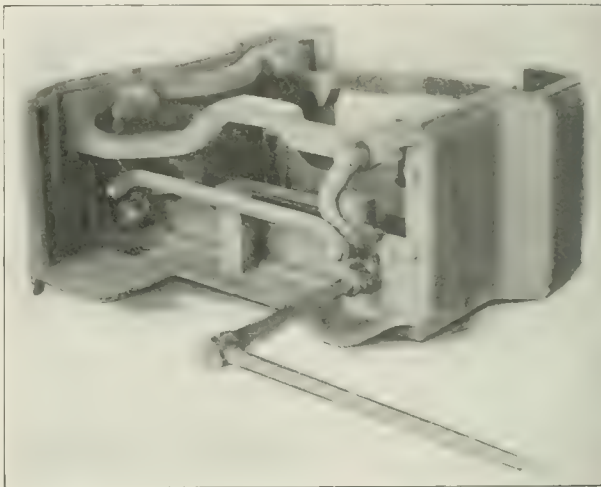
Another Type of Machine for Molding Frame Patterns. eight men, which are not skilled workmen but ordinary laborers, produce from 250 to 260 wheel molds and 135 frame molds per day.
